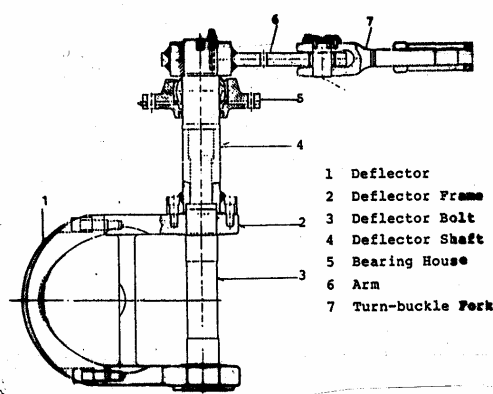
Deflector mechanism (Courtesy of Kvaerner Brug)
